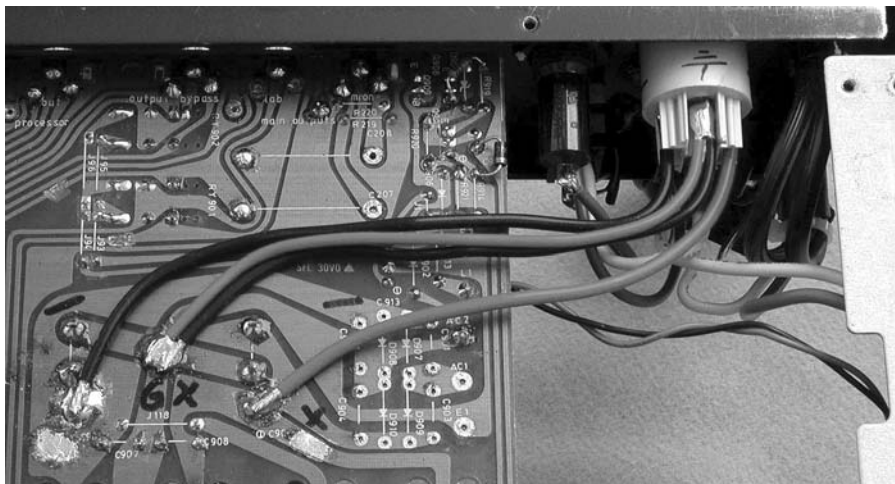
Inside the preamp, bottom view, showing the DC supply connections to the main PC board.
